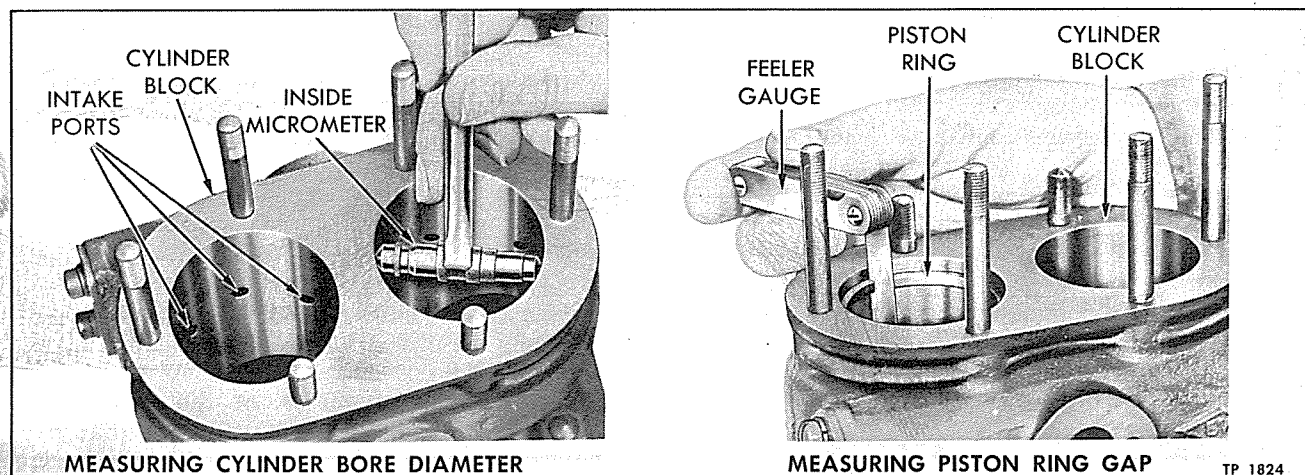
Compressor Cylinder Bore and Piston Ring Inspection
